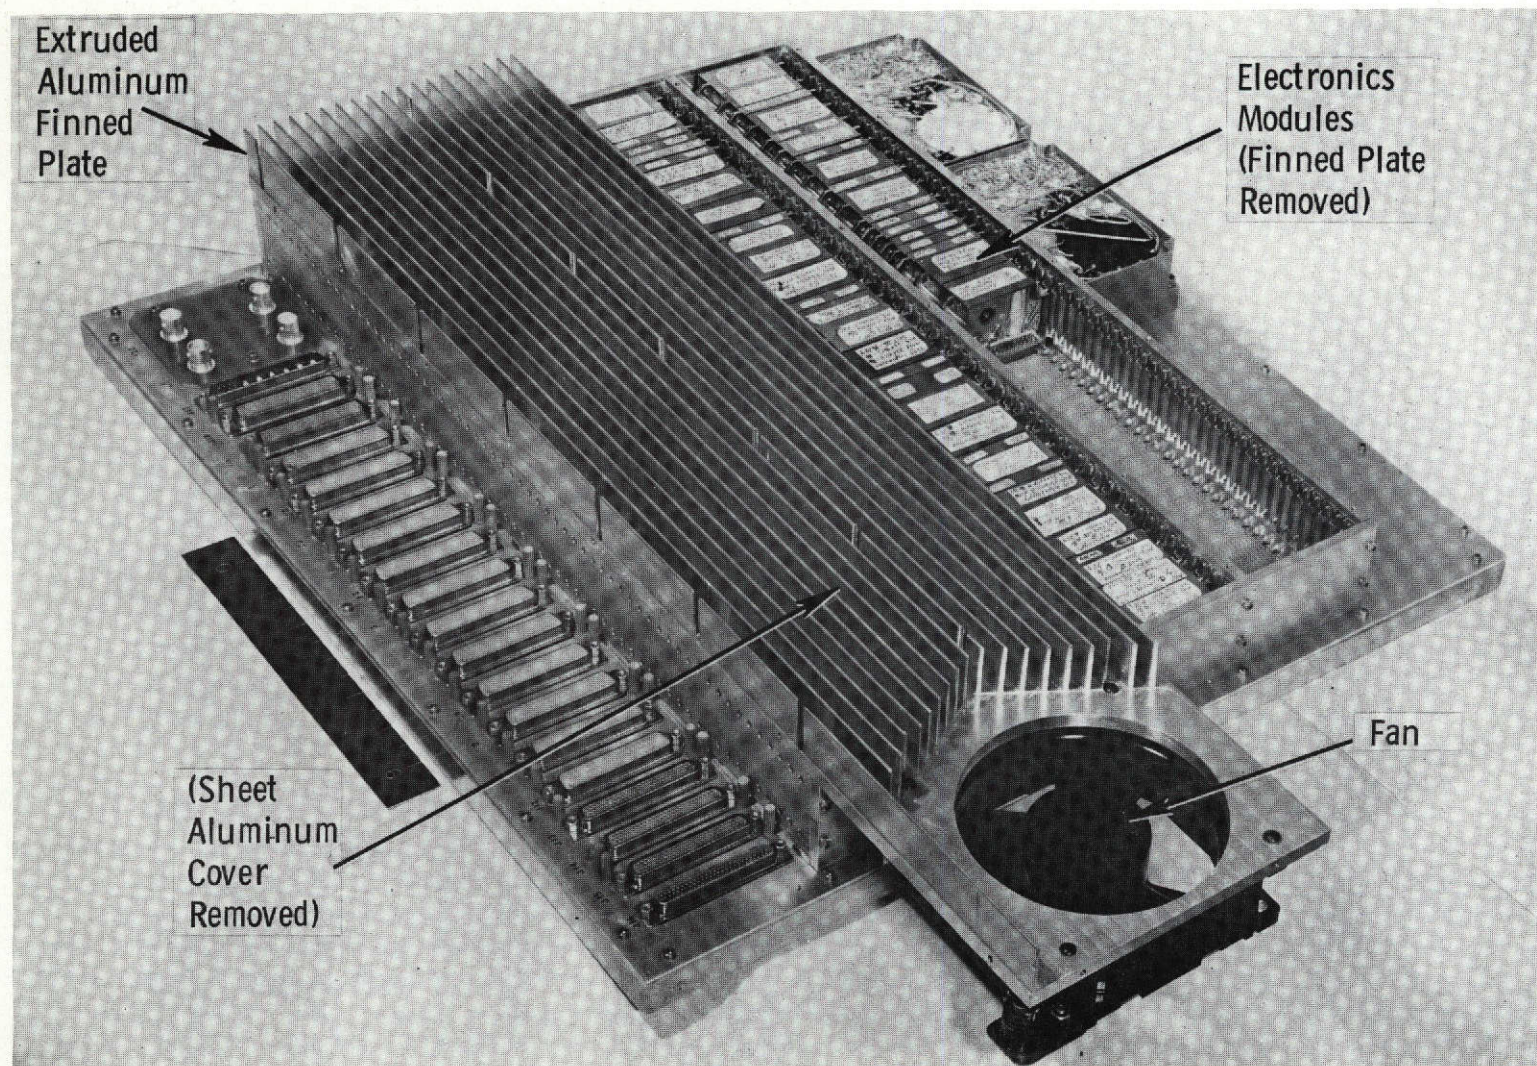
SIRU Forced-Air Cooled Electronics Assembly
